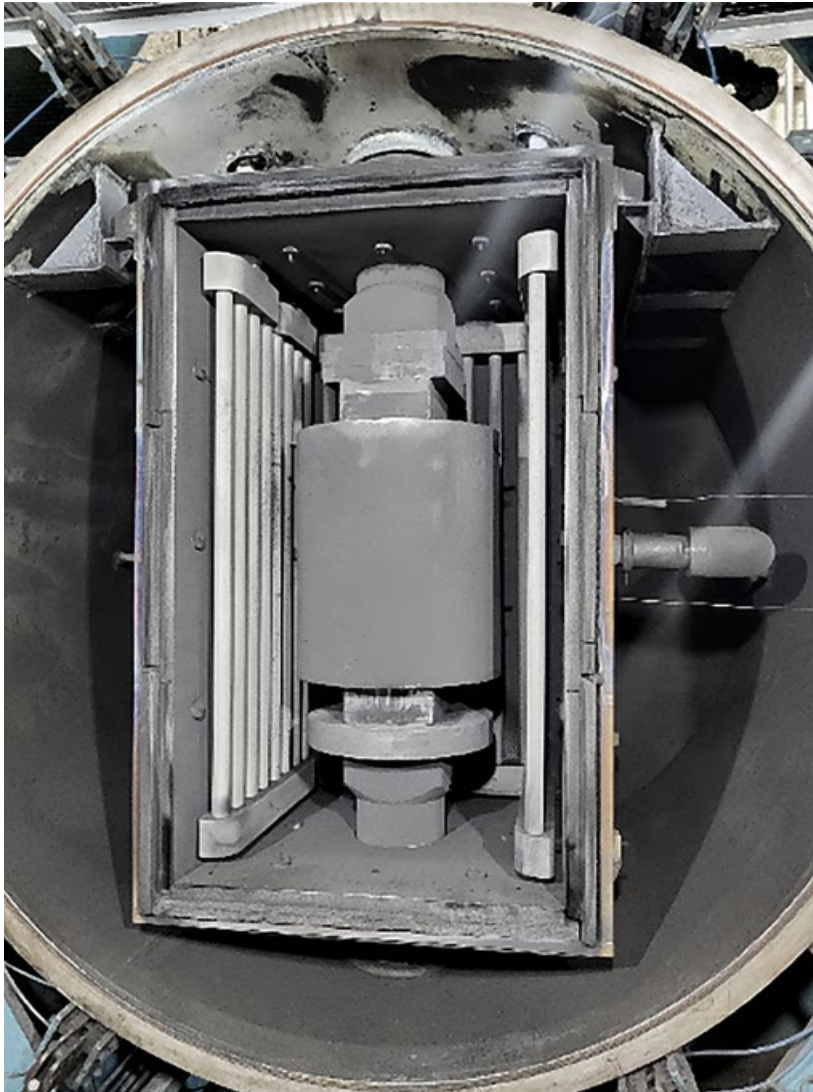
Graphite tooling assembly inside a Hot Press furnace (Courtesy Centorr Vacuum Industries)
